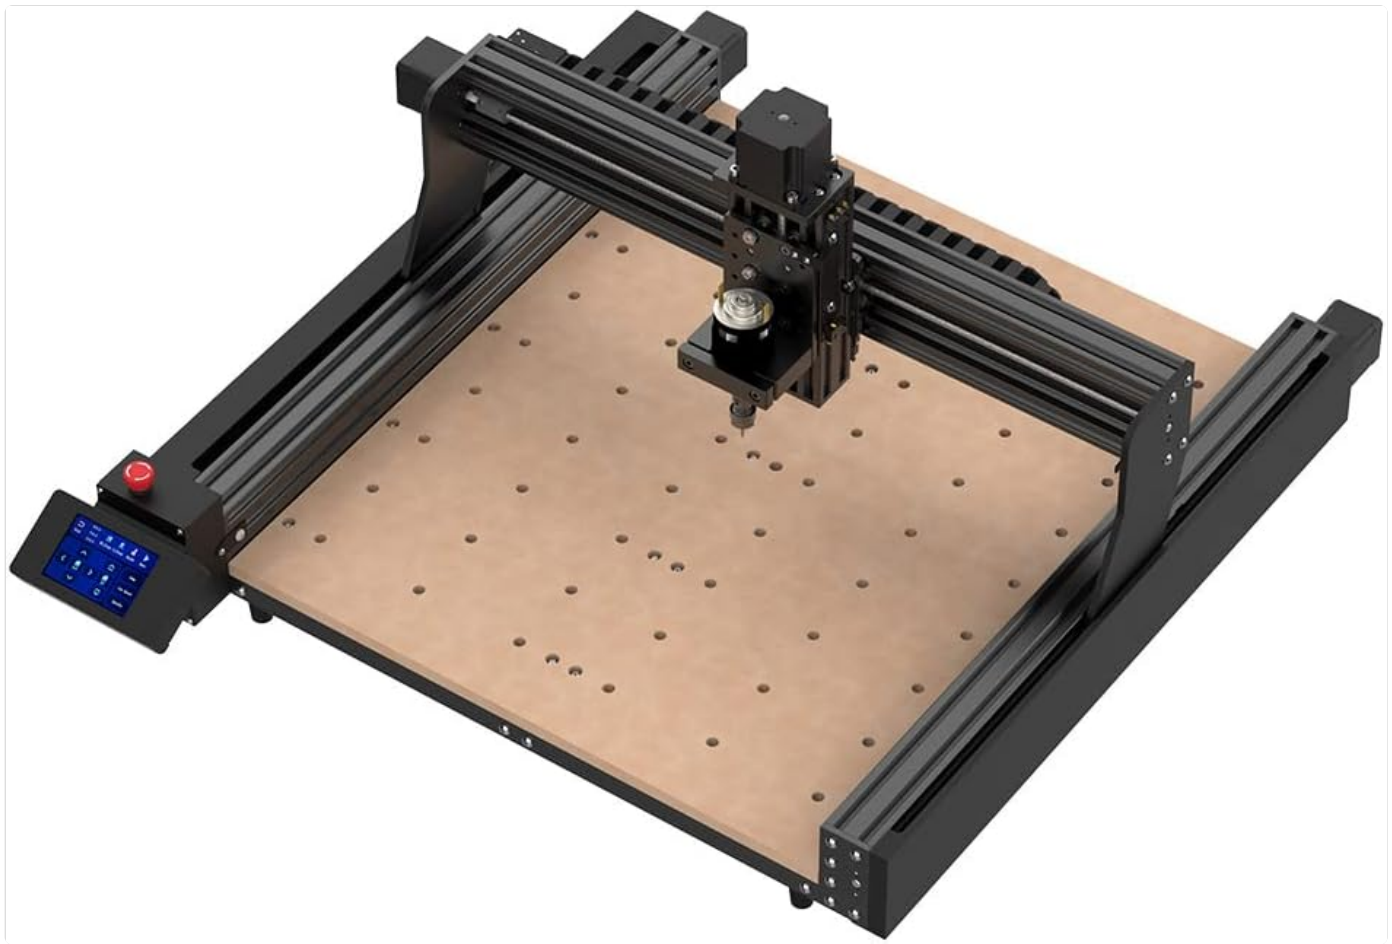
Overview of the TTC 450 CNC Milling Machine.
